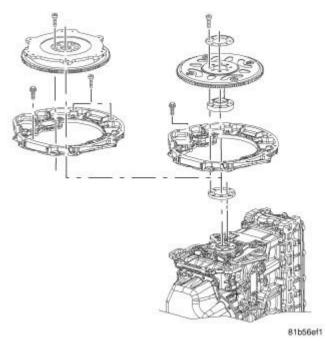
Flywheel & Flex Plate Courtesy of CHRYSLER LLC
